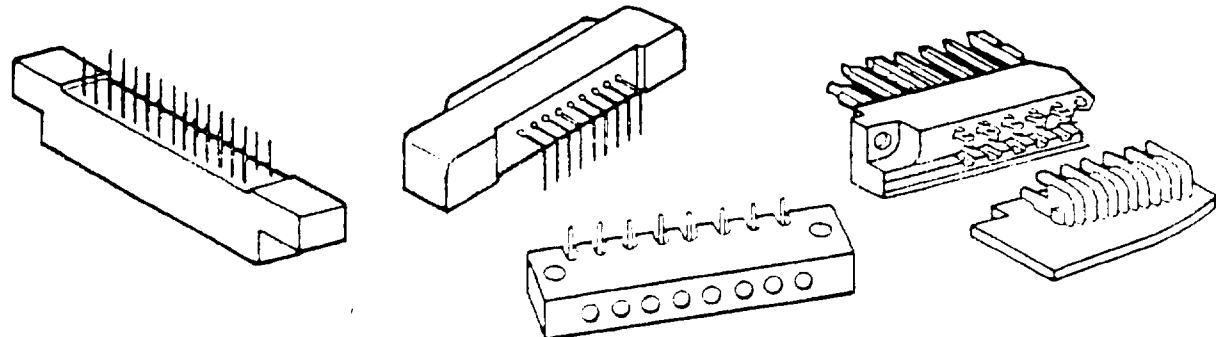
In-line printed wiring board connectors (see 5.3.19.9.4).
